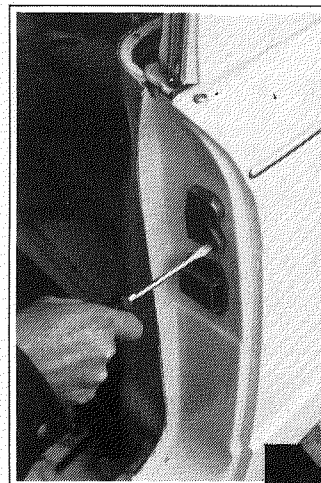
and striker plates should be made and the main door hinge bolts fully tightened. (For more details on body fitting see Part 23). Not shown here but previously carried out was the pop rivetting in of new side trim clips and the rolling on of the stainless steel side trims.
